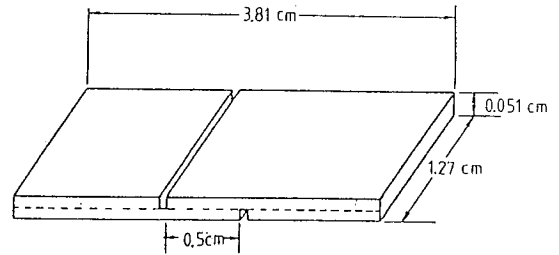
Dimensions of specimen for the interlaminar shear test in tension mode without supporting fixture
